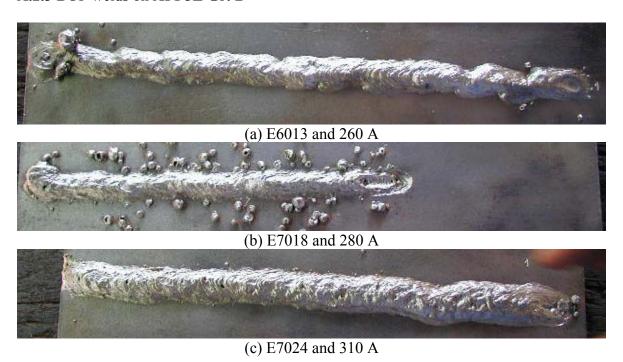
Pictures of the bead-on-plate wet welds deposited with the three electrode types with electrode positive on API 5L Gr. B steel plates at 50 m.
